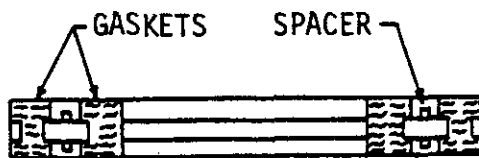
WILSON TYPE VACUUM SHAFT SEAL (80)
